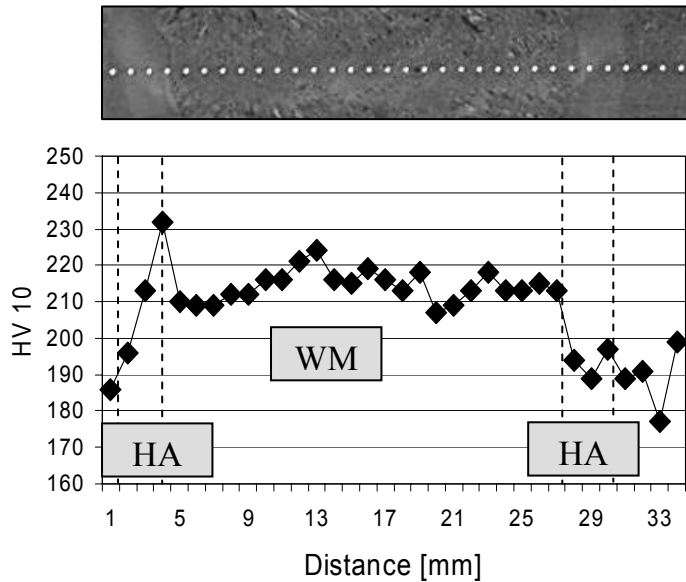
Macrograph and cross-weld hardness profile of the tube weld after post-weld heat treatment.
